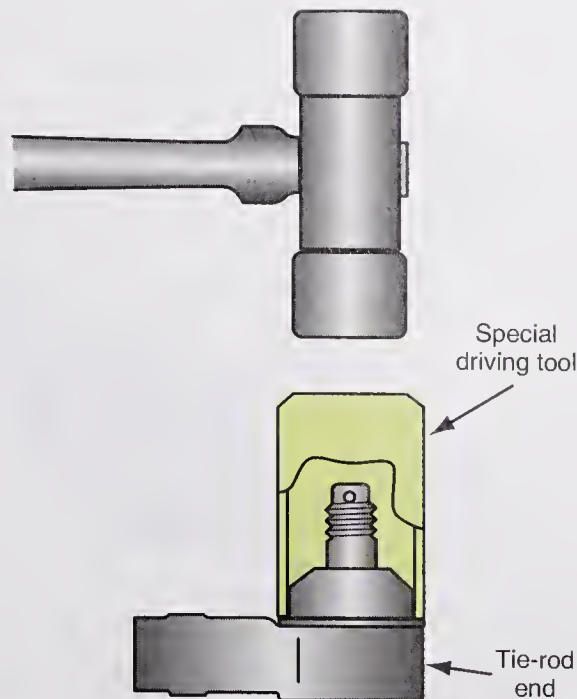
Driving the boot onto the tie-rod end with a special driving tool.
